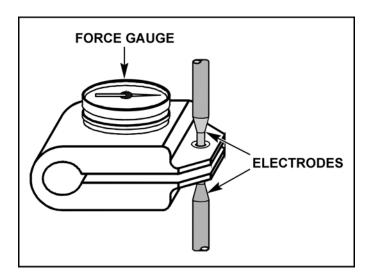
Measuring Preset Firing Force of the Weld Head with a Force Gauge
